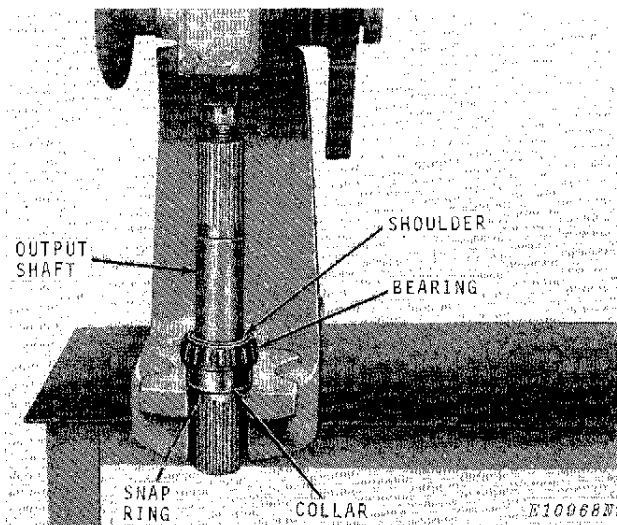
Backseating the Outer Bearing and Collar on the Output Shaft
